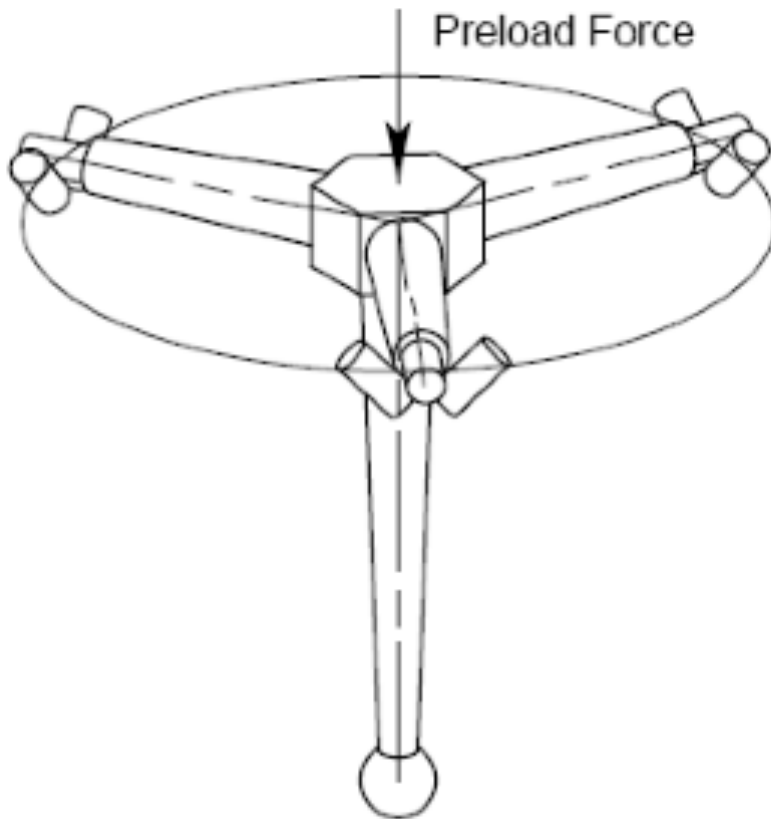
Kinematic design employing cylindrical surfaces as guides. Such surfaces can be accurately made.
